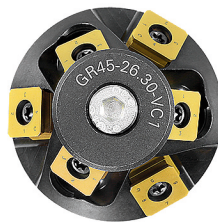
°-bevel-milling head with 3 x 2 cutting edges and guide roller, equipped with 6 bevel-indexable inserts of type K
